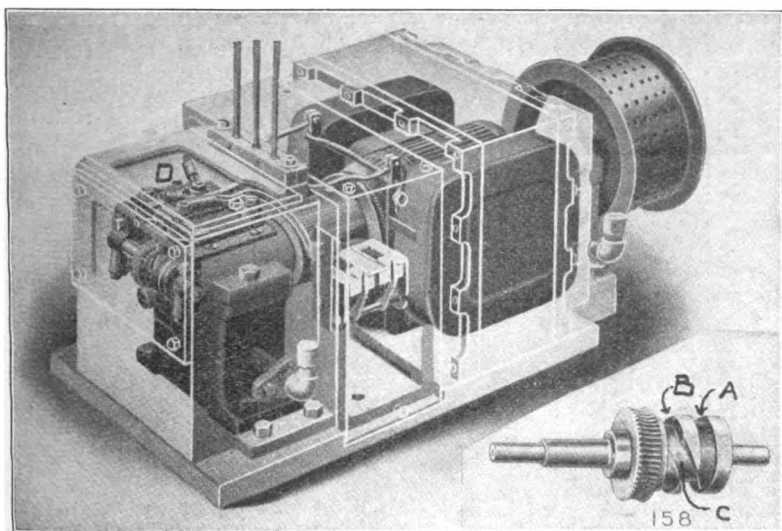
PLATE XVIII.—GENERATOR OF CONSOLIDATED AXLE EQUIPMENT.
